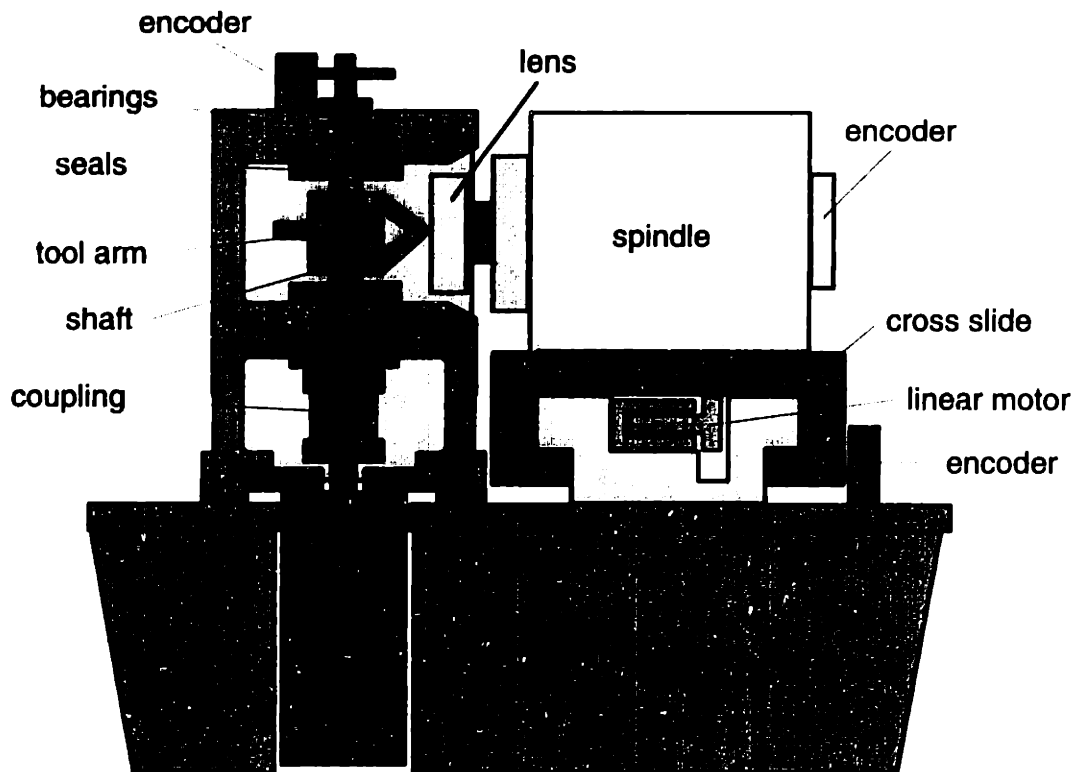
Schematic cross-sectional view of the turning machine showing major components. From Ludwick[12]
